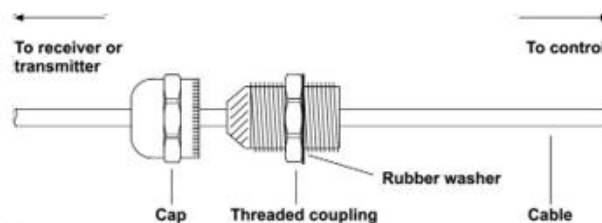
Cable Being Threaded through Top of Gland Nut and Threaded Coupling
